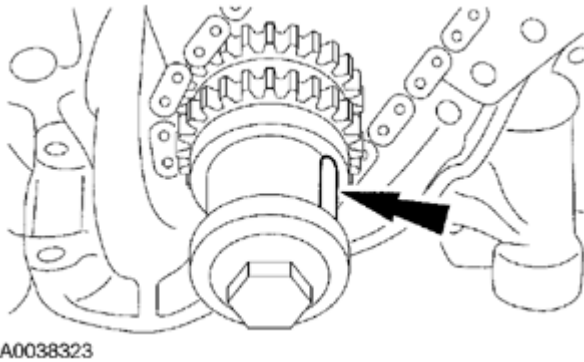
Locating Crankshaft Keyway Is In 3 O'Clock Position
